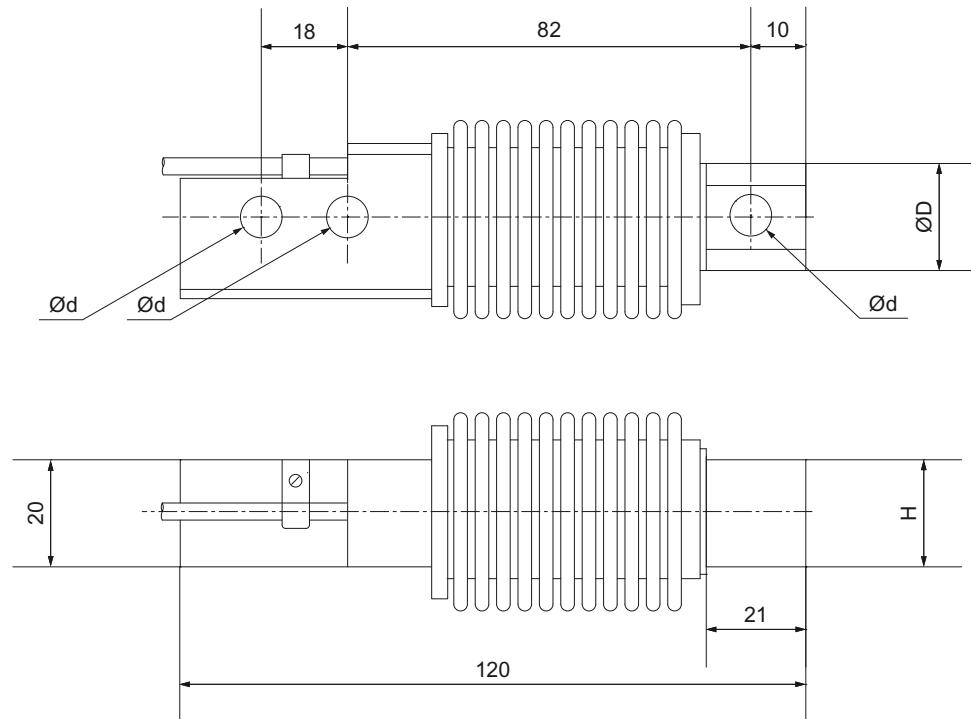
SIWAREX WL230 BB-S SA dimension drawing
